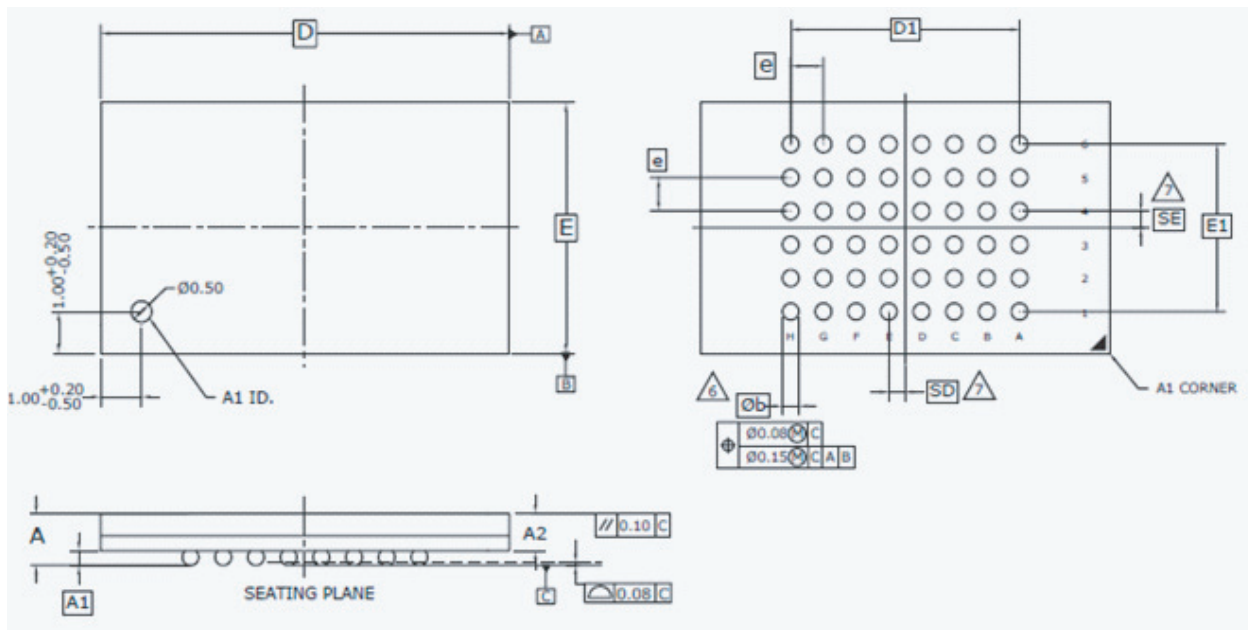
VBK048 Drawing (S29GL032N and S29JL032J)
